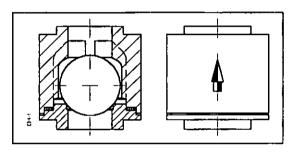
Single Ball Valve - Sectional and Plan View
